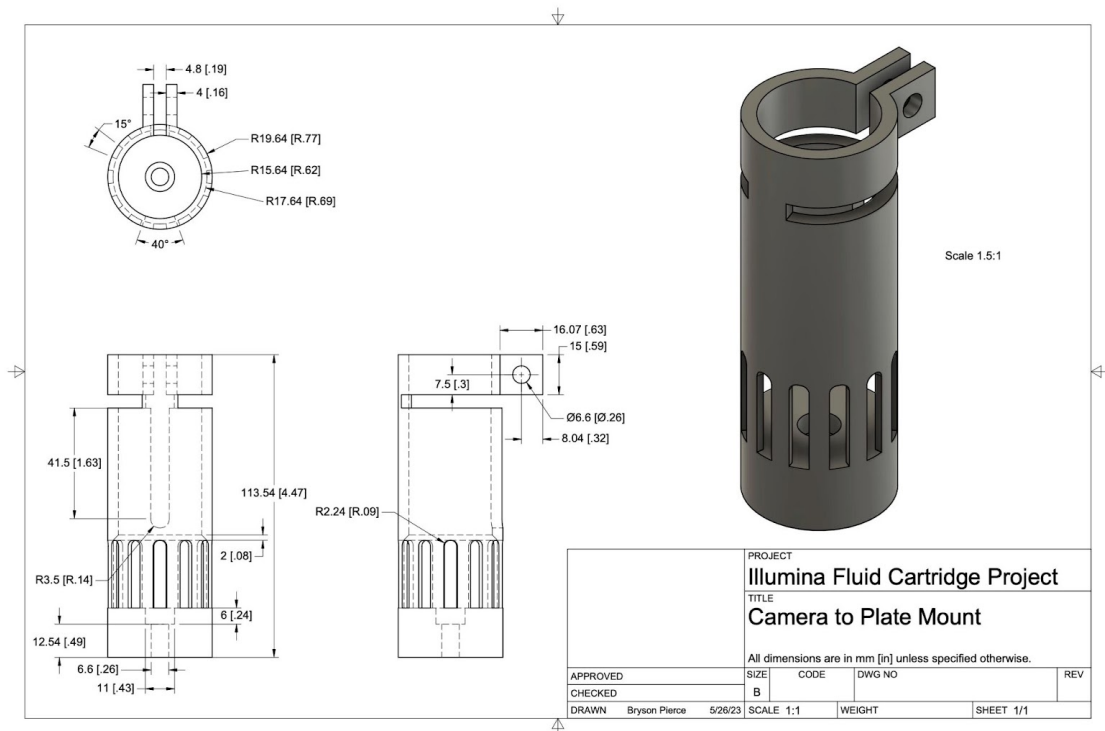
Technical drawing of custom "Camera to Plate Mount". Can be seen in clearer detail in Appendix C.
